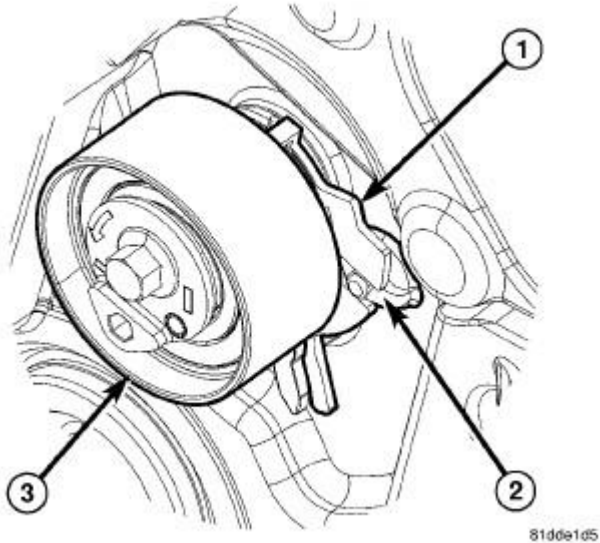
Timing Belt Tensioner & Tensioner Alignment Plate
